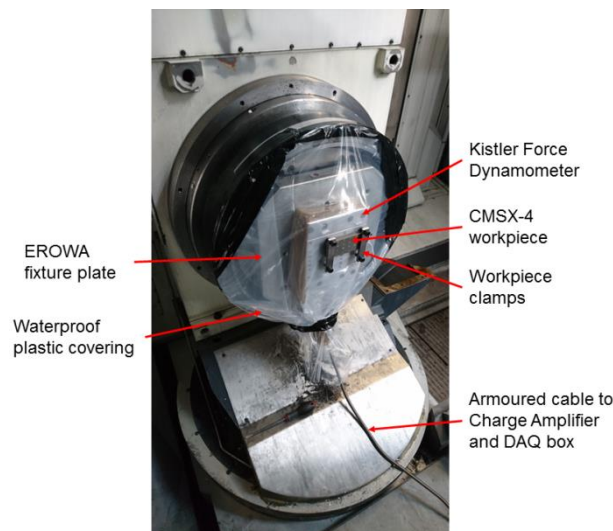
TEST SETUP FOR SECTION 3.4 AND 3.5 FORCE MEASUREMENT DURING GRINDING.
